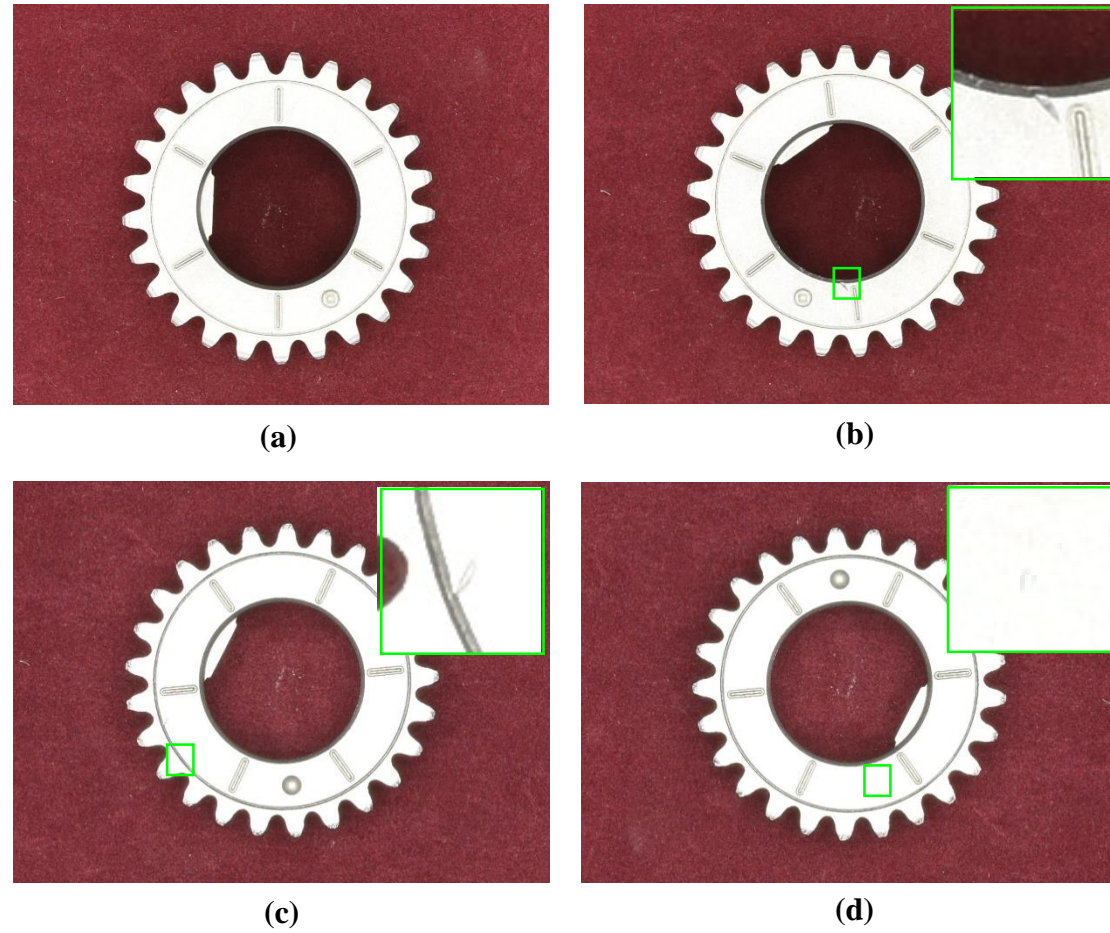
Mechanical parts. (a) A normal part. (b-d) Parts with tiny surface defects. From the view of engineers, the scratch with over 0.5mm depth is considered as a defect).
